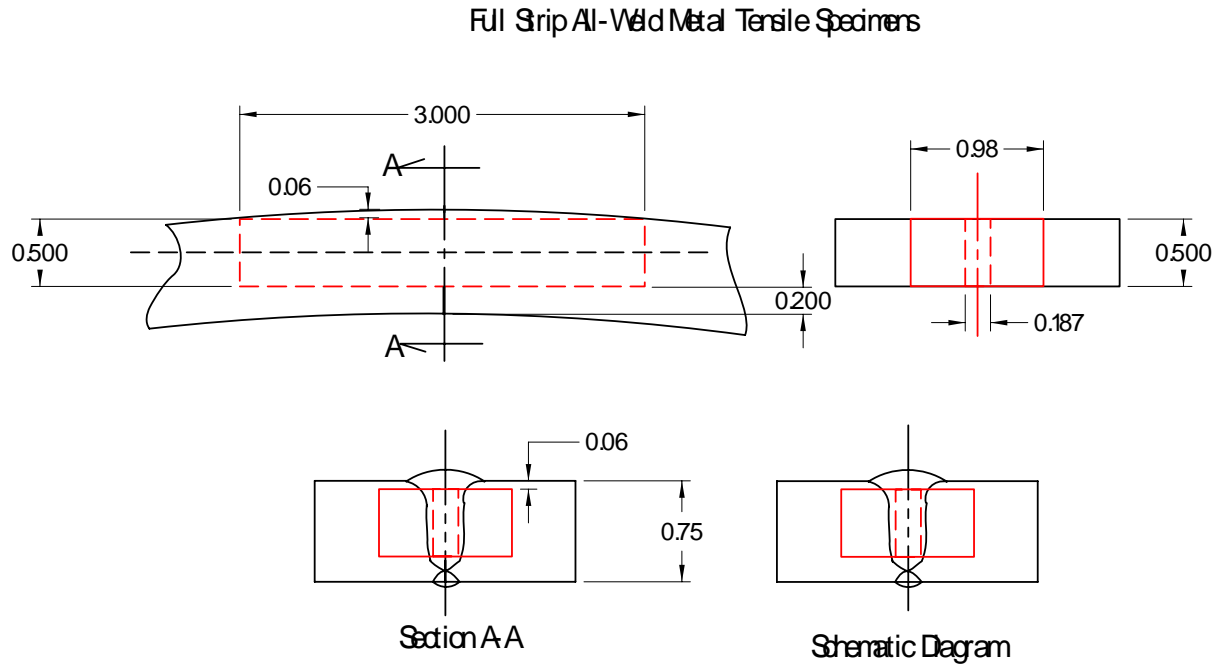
Schematic Showing Weld Cross-sections and Locations of Strip Tensiles
